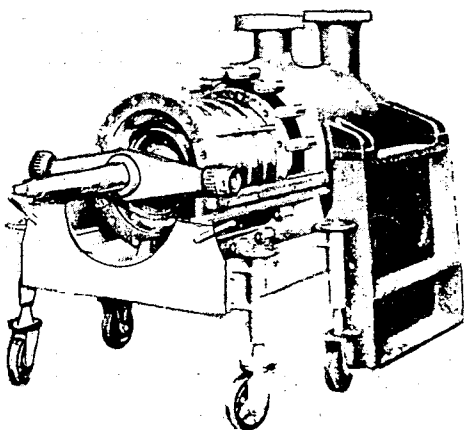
Rotor assembly of radially split double-casing pump being inserted into its outer casing.
